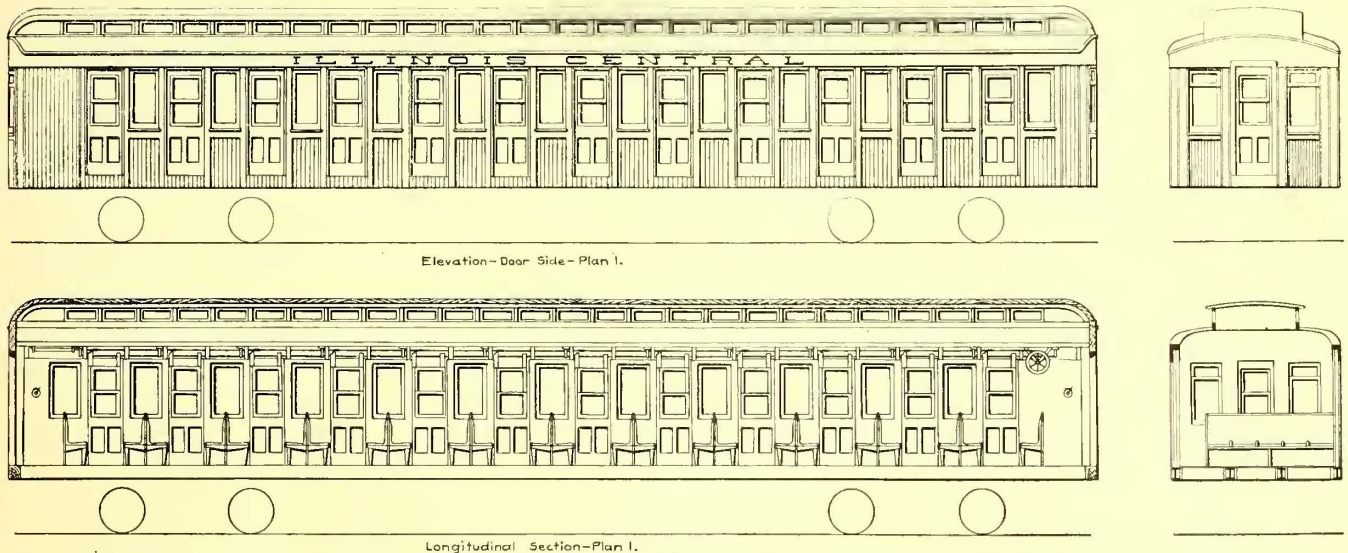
ELEVATIONS AND SECTIONS OF STEEL-FRAME, SIDE-DOOR SUBURBAN PASSENGER CARS FOR ILLINOIS CENTRAL RAILROAD
